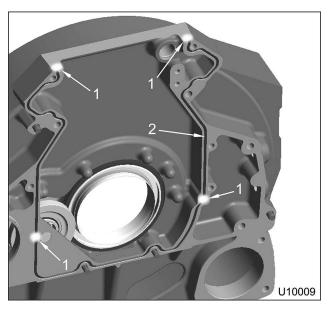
Removal of rear cover gasket and Liquid Gasket (RTV)
